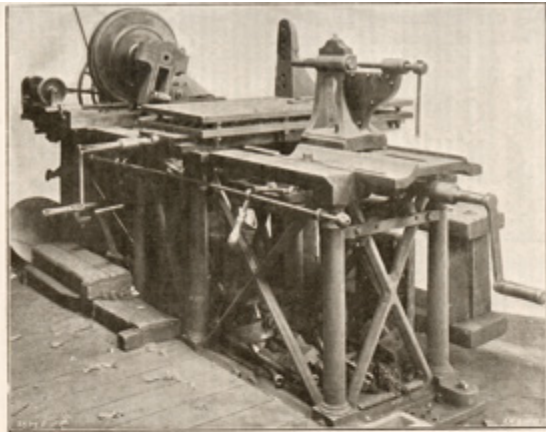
BORING AND MILLING LATHE WITH SELF-ACTING FEEDS.
